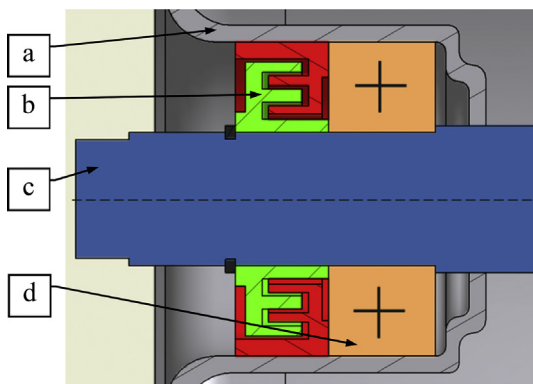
An exemplary design of a bearing assembly with a double-sided labyrinth seal: a – idler's hub, b – labyrinth seal, c – idler's axis, d – ball bearing.
